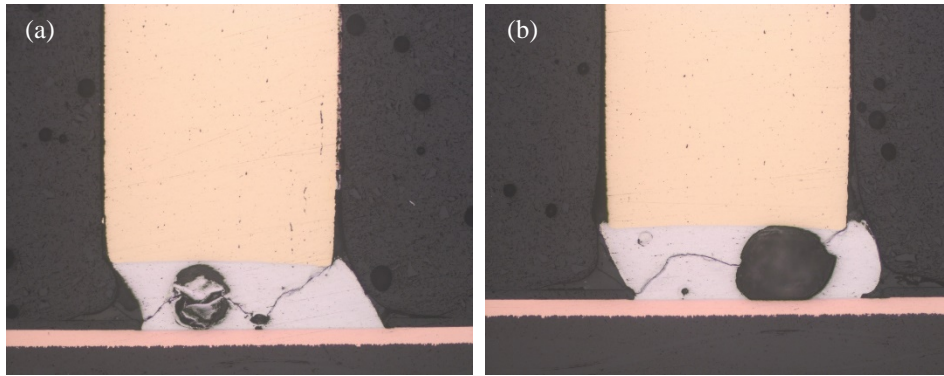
Solder joints made with SAC305 solder paste with excessive voiding and overstress cracks
